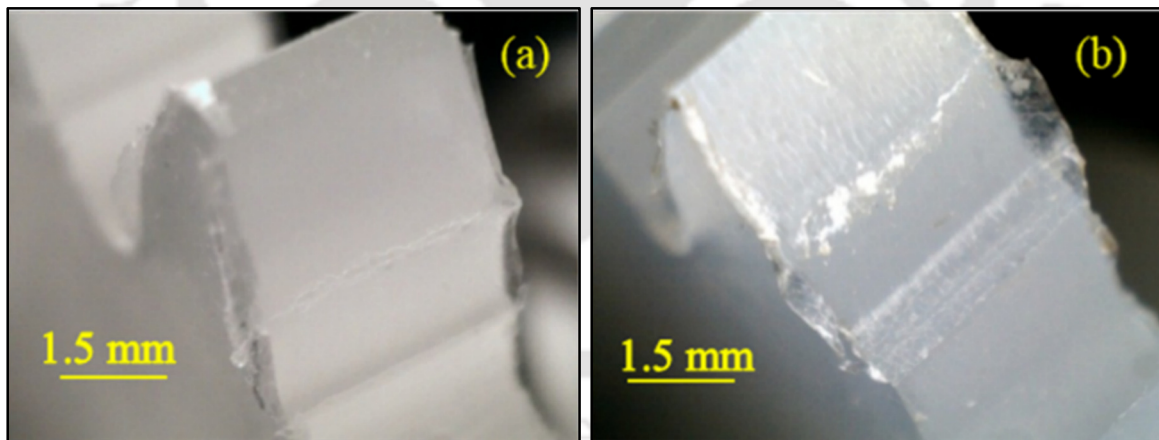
Worn out gear tooth surface of (a) symmetric gear and (b) asymmetric gear after 1.45×10^5 cycles, 2.5 Nm
